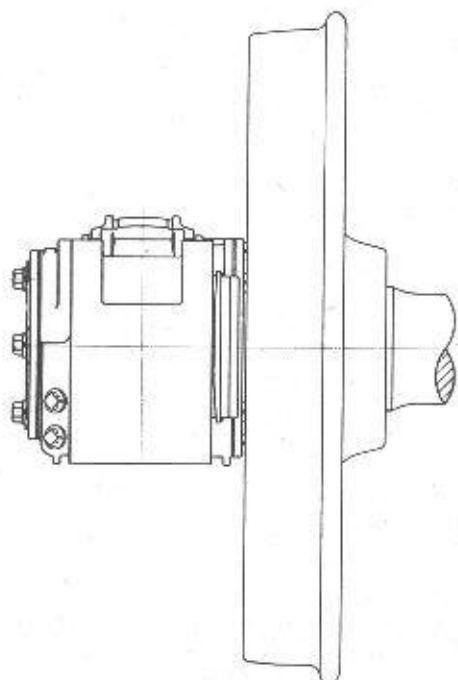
A. Hyatt Roller Bearing Journal Box assembled on the journal.
